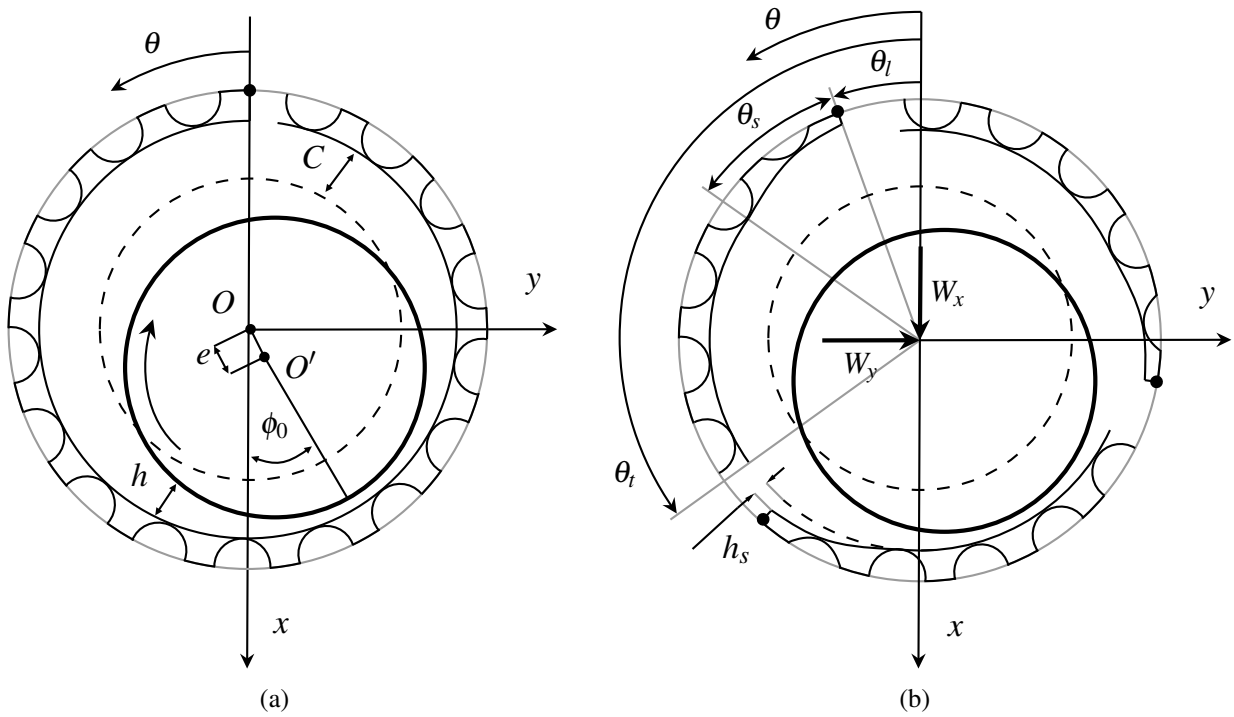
Detailed view geometry of the rigid rotor supported by foil bearing:
